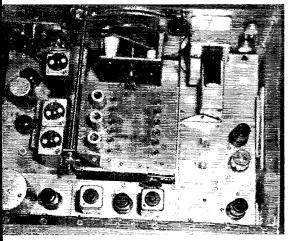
This 26-tube receiver illustrates "plate" construction. The "front-end" coil assembly is plug-in and has been removed to show the homemade dial and drive mechanism.
